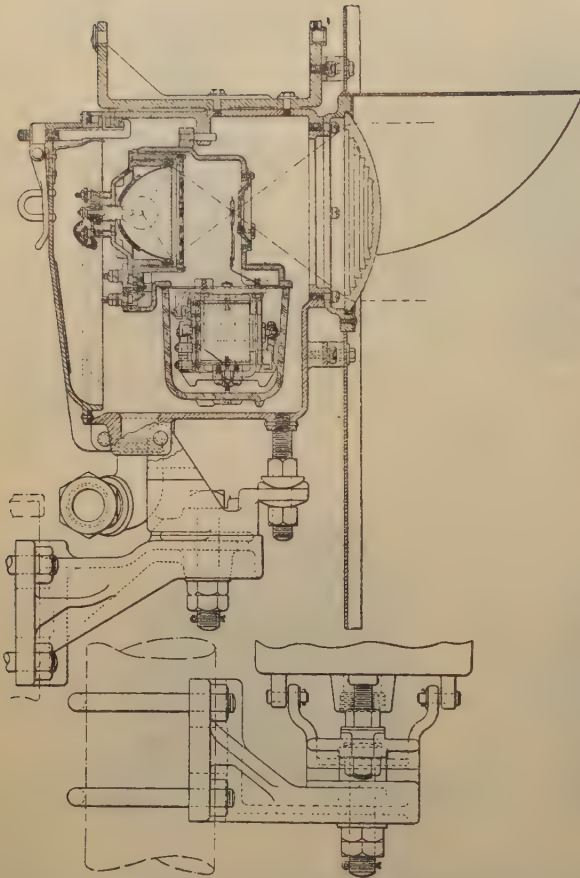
Details of searchlight high signal. Sectional view of operating unit and case illustrates optical principle and "front of mast" mounting. Lower view shows "side of mast" mounting.
